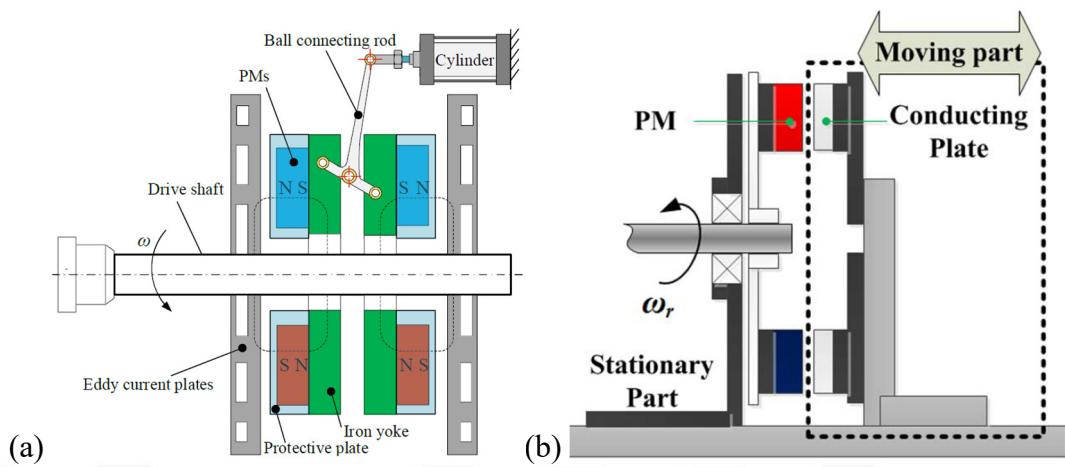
Typical PM-ECB examples: (a) moving stator [36] and (b) moving brake disc [31]
